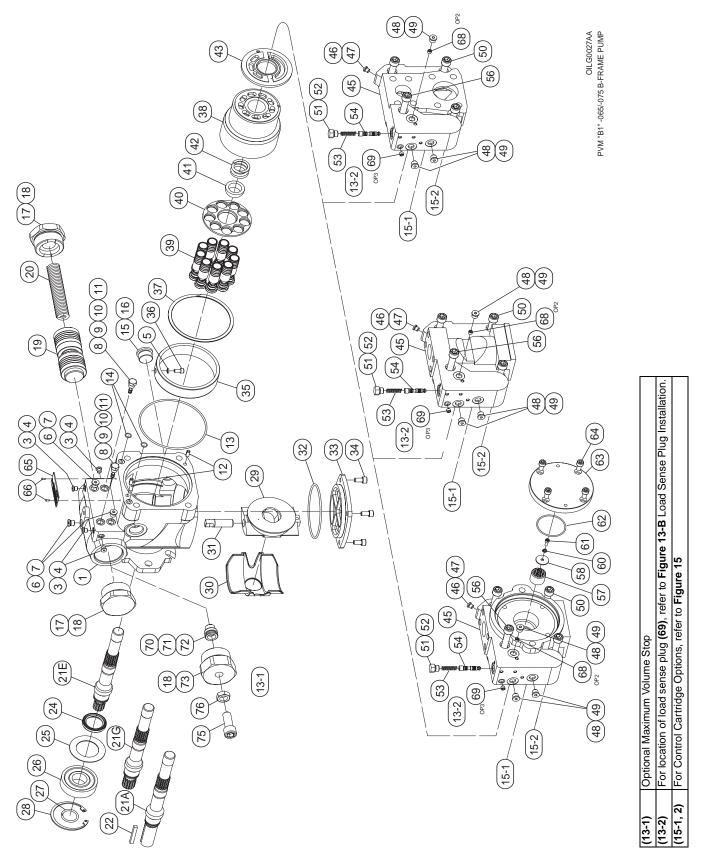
A. Exploded Parts Drawing for PVM-065/-075 B-Frame (519272-202 sheet 1) Right Hand Shown
